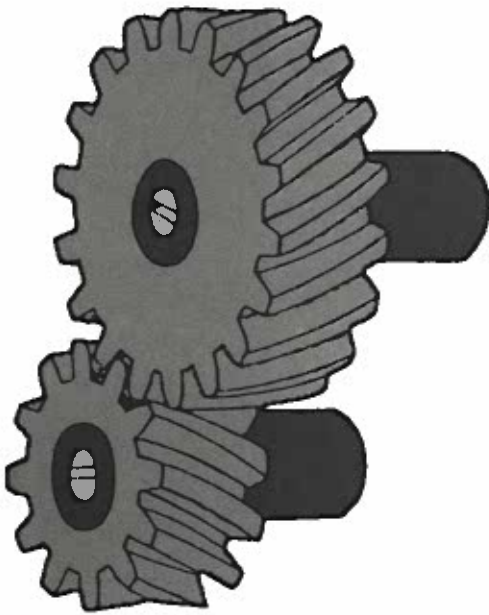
Helical gears, cut at an angle, allow several teeth to engage at one time.
